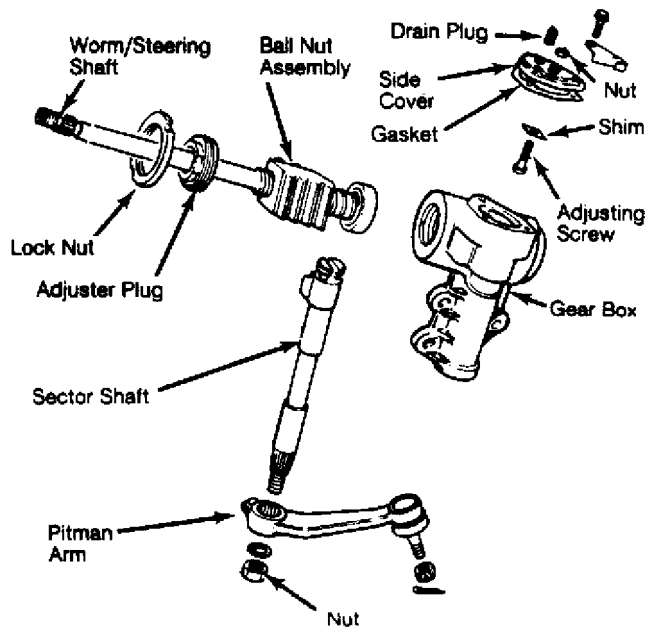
Exploded View of Steering Gear Assembly (RX7)
